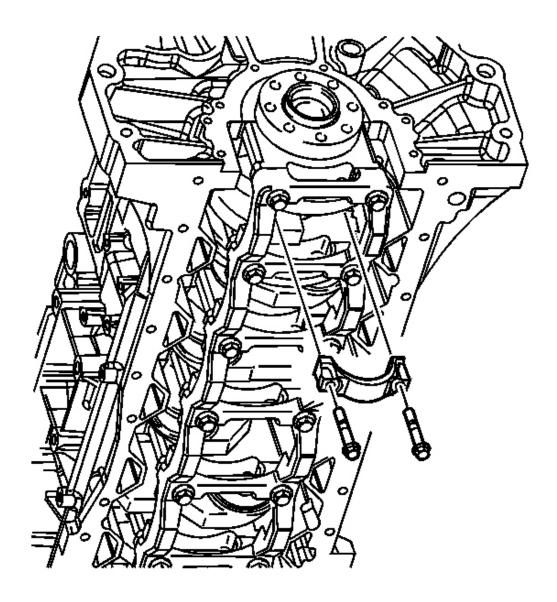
View Of Connecting Rod, Cap & Bolts Courtesy of GENERAL MOTORS CORP.
